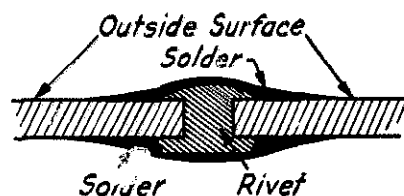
Utensils with small holes may be repaired by soldering.
